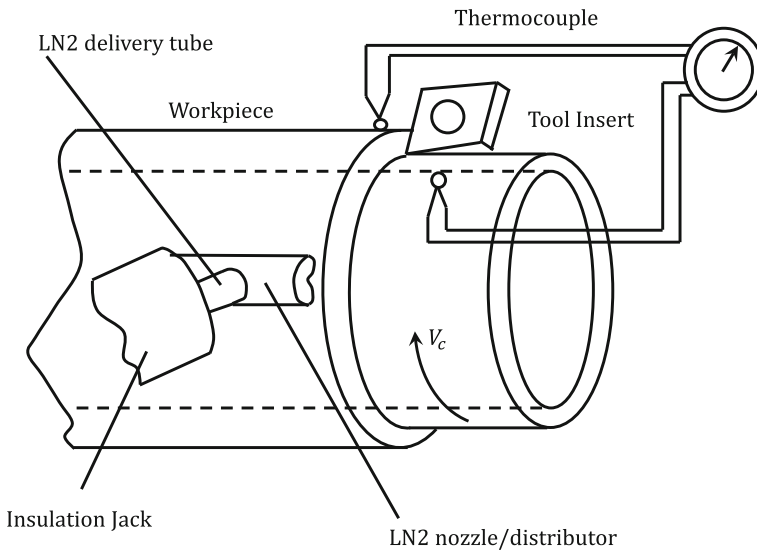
Schematic of the experimental system for cryogenic pre-cooling of workpiece [17]
